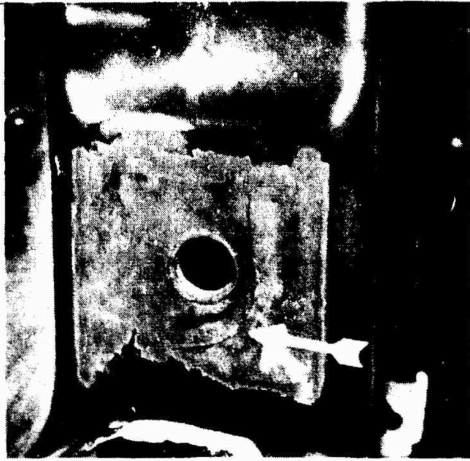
Arrow Denotes 1-1/4-Inch Crack On Rear-Differential Right Rear Mounting Bracket On M151A1 after 25,276 Test Miles.
